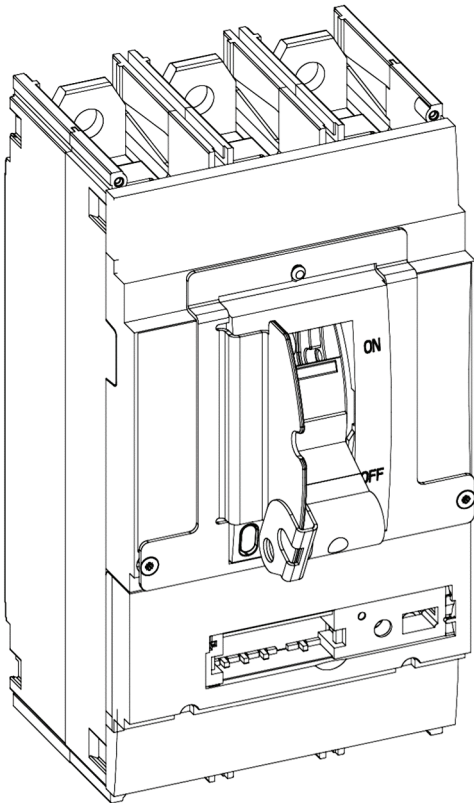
Padlocking kit installed on a Record Plus™ FG600 circuit breaker.
